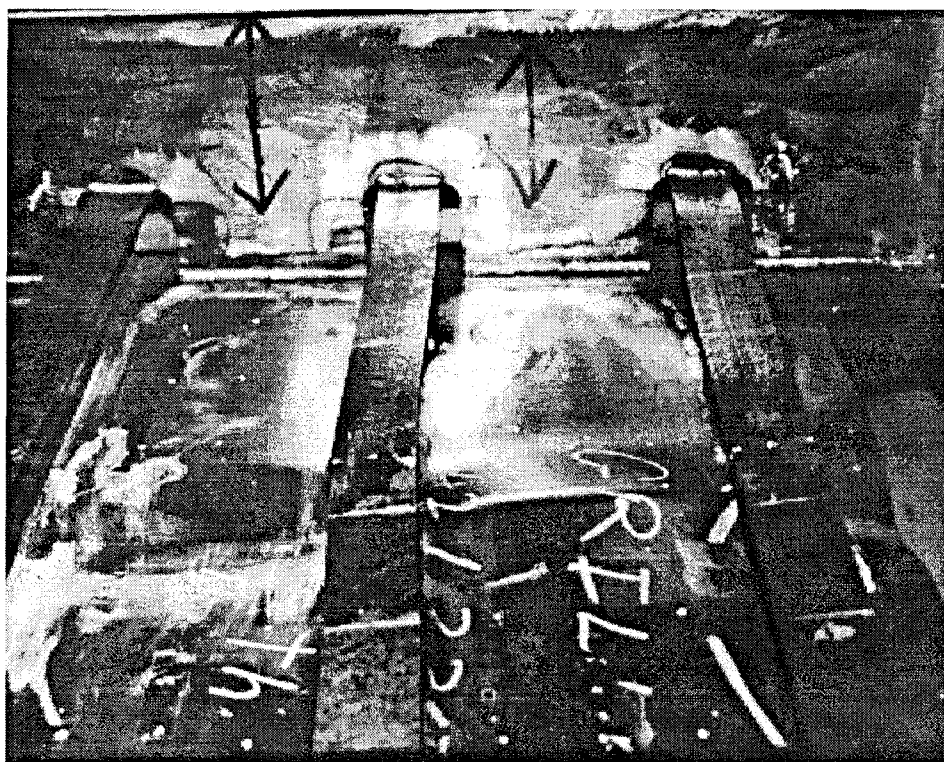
Top of grillage (detail of center bay, looking aft)
